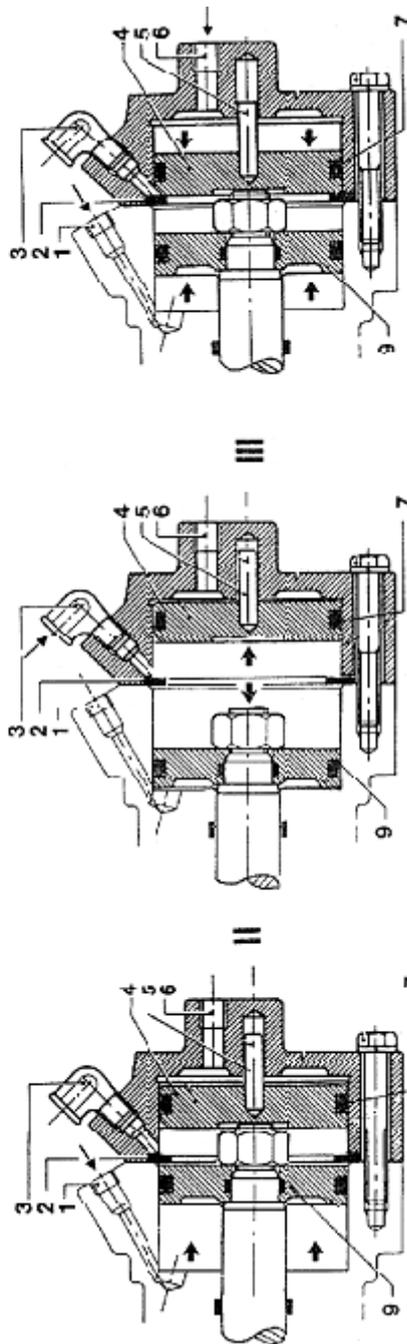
13 Gas Route Diagram of High/Low Gearshift of Secondary Transmission
